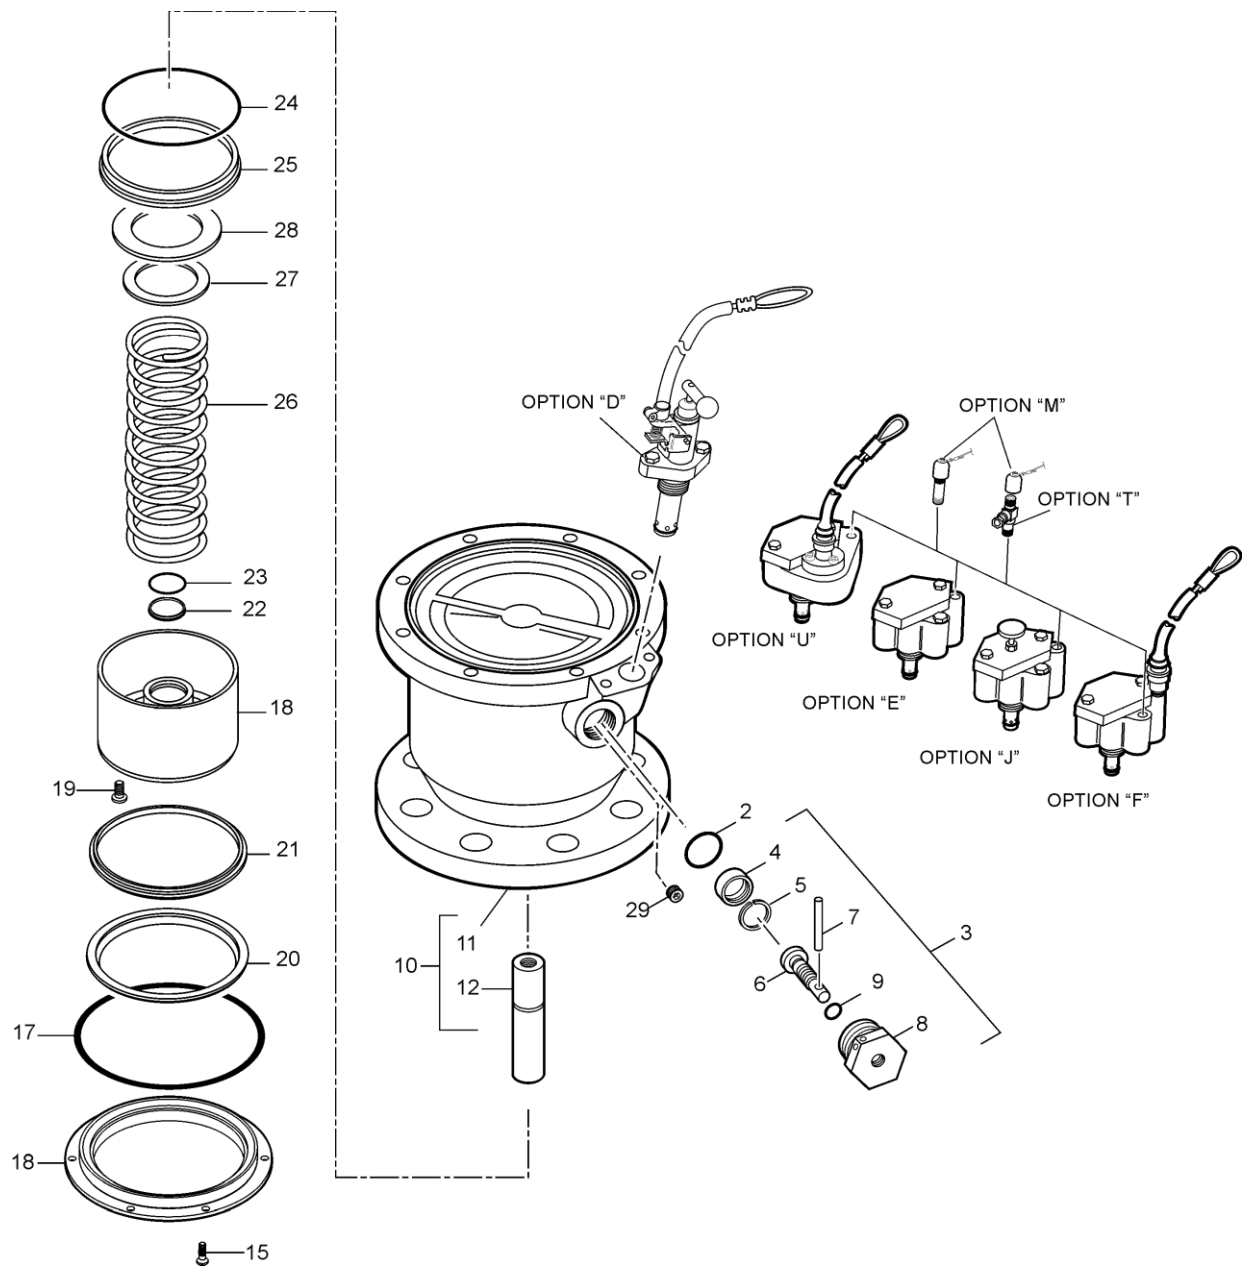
LOWER HALF ASSEMBLY (4-1)
